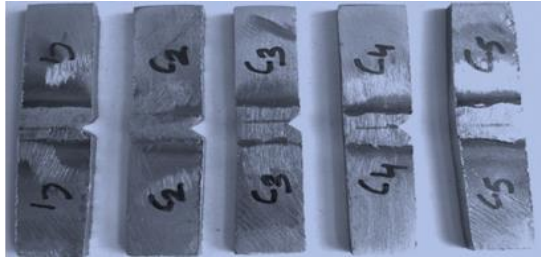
(c) MIG joints using ER430 filler metal Specimen for impact test
